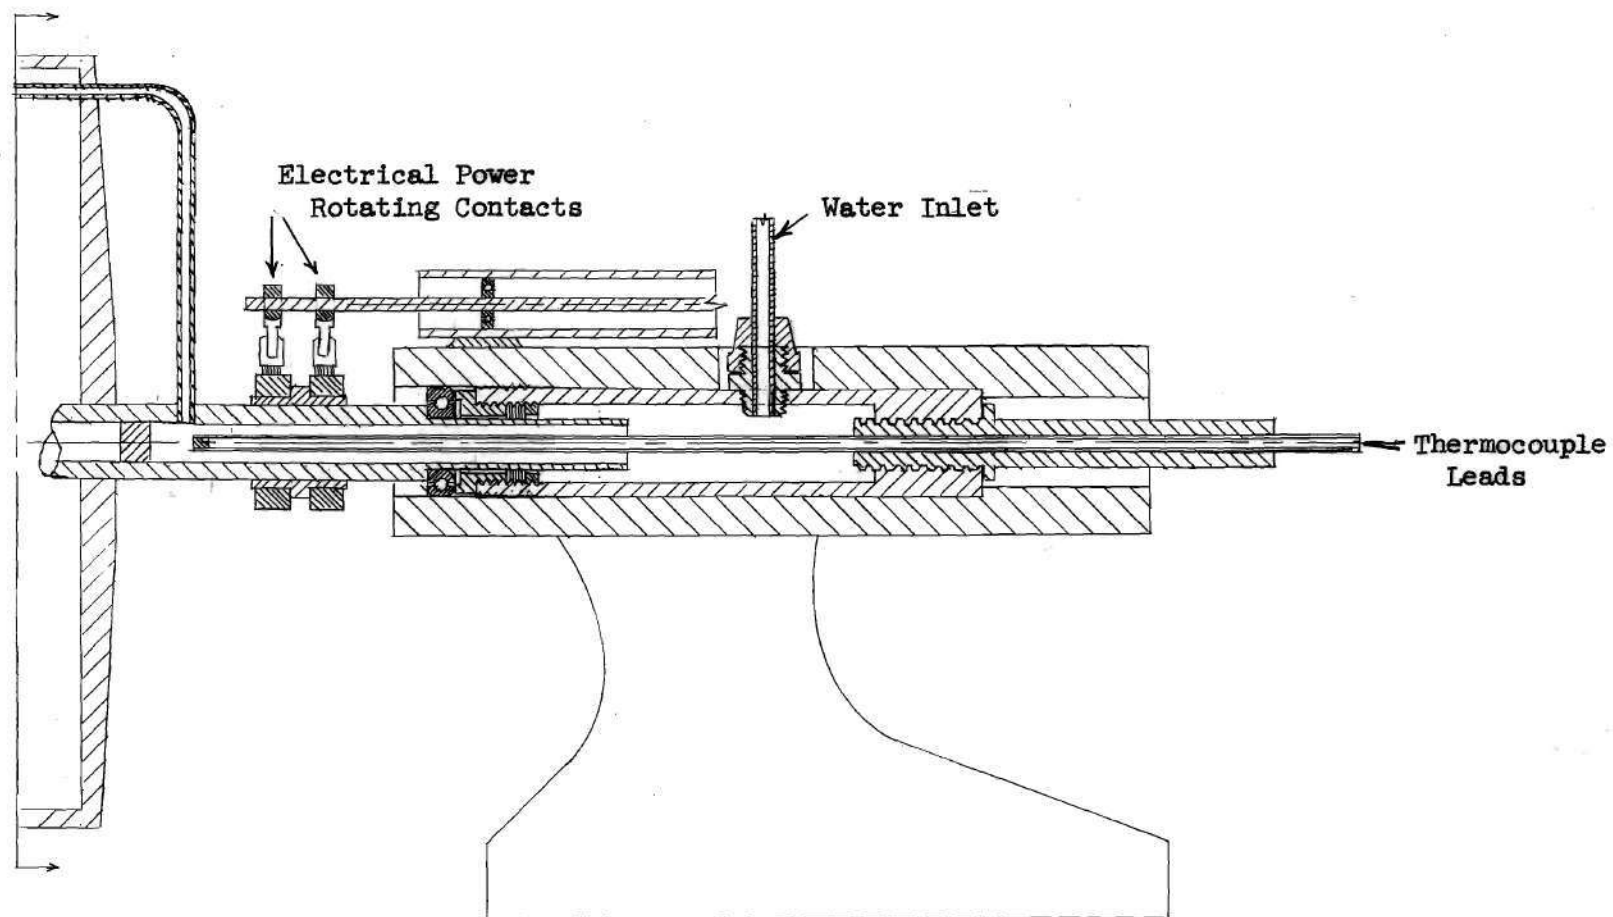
Detail View of Bearing Housing, Water Probe and Slip Ring Arrangement
